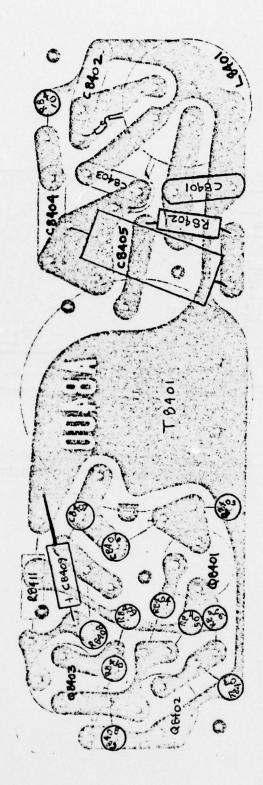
P.C. BOARD LAYOUT FOR THE A8400A TRANSMIT HUNT GENERATOR ASSEMBLY
